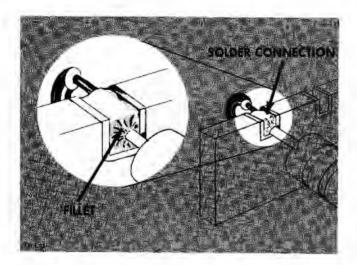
A slight fillet of solder is formed around the wire when heat is applied correctly.
